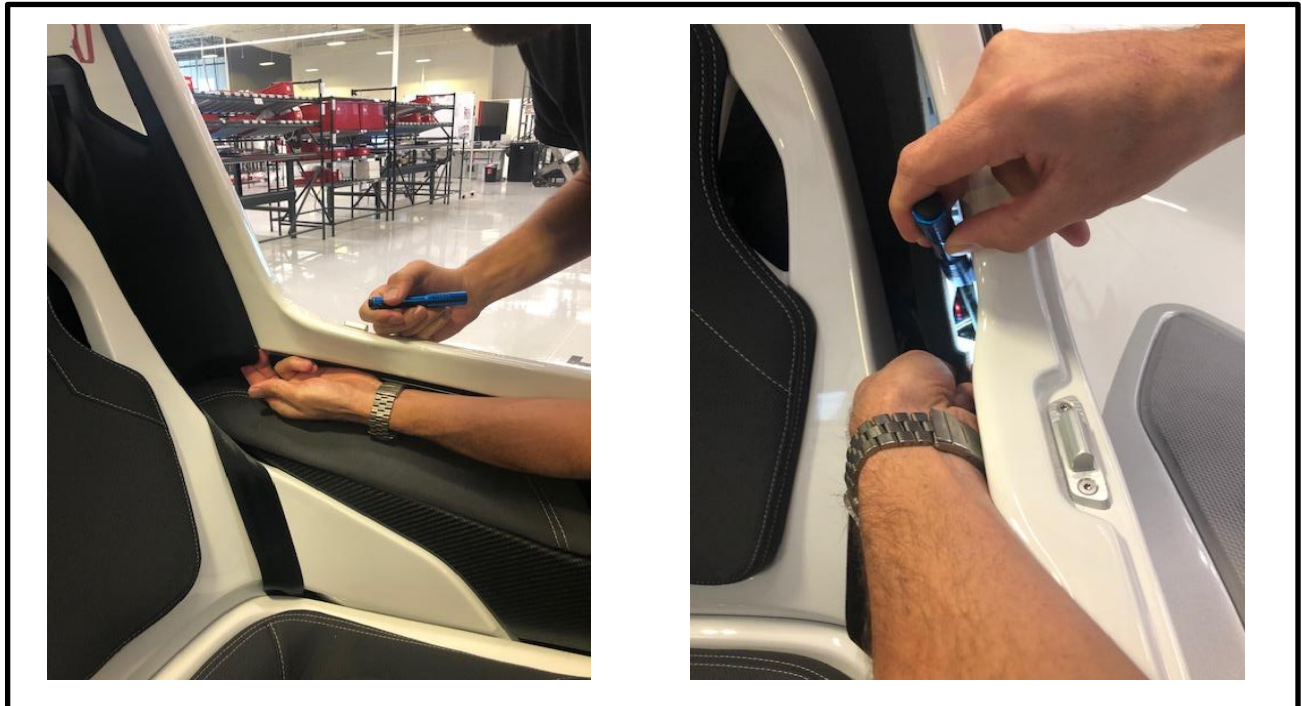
Hook the left side cabin liner with fingers as shown and carefully flex liner inboard enough to insert a small flashlight.
